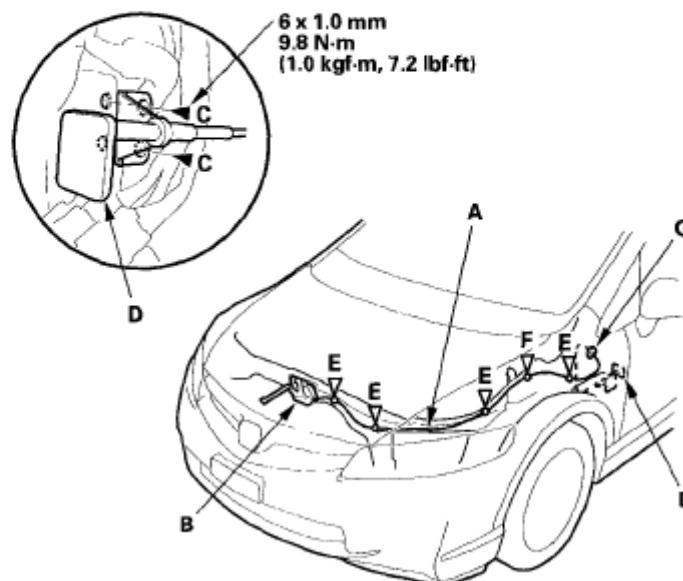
Identifying Hood Opener Cable, Hood Latch And Hood Release Handle (With Torque Specifications)
